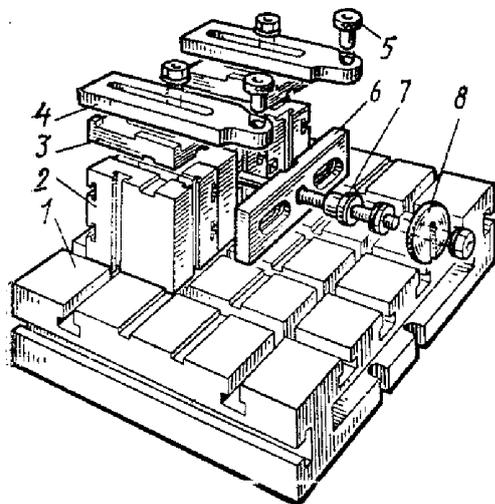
Scheme build prefabricated universal machine tool accessories: 1 – square plate, 2 – rectangular pillar, 3 – support,
